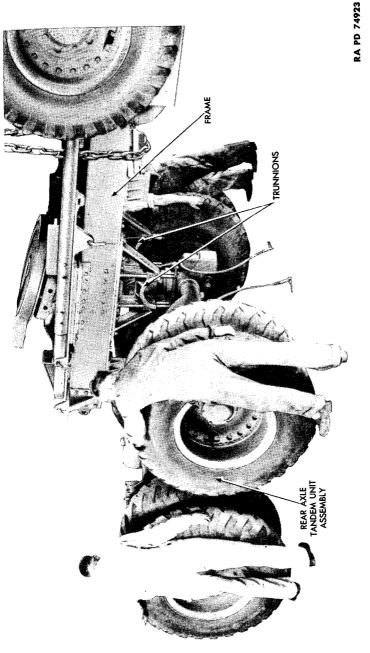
Removal of Rear Axle Tandem Unit Assembly
